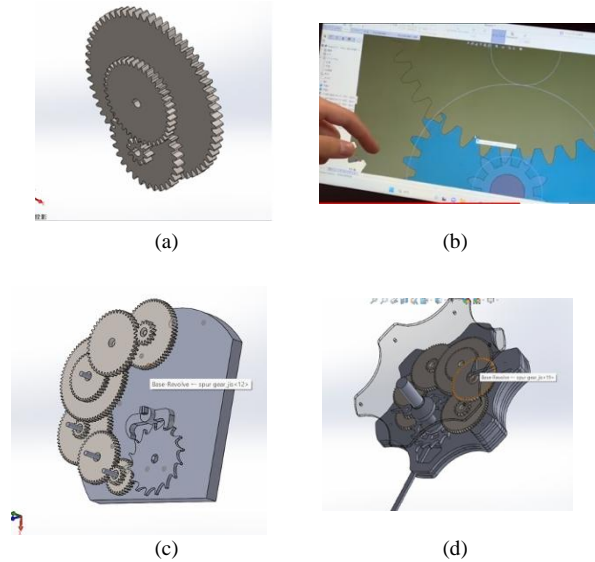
Process of creating the mechanical material (a). Gear design in SolidWorks (b). Simulation of gear meshing (c). Assembly (d). Completion of assembly
